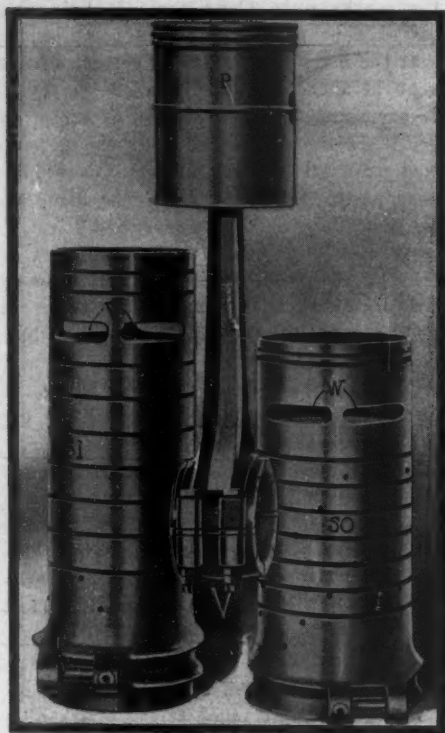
Two Sleeves and Piston in the Stearns-Knight Motor for 1912
